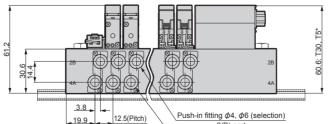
Refer to page 37 for detailed dimensions of the wiring block.
